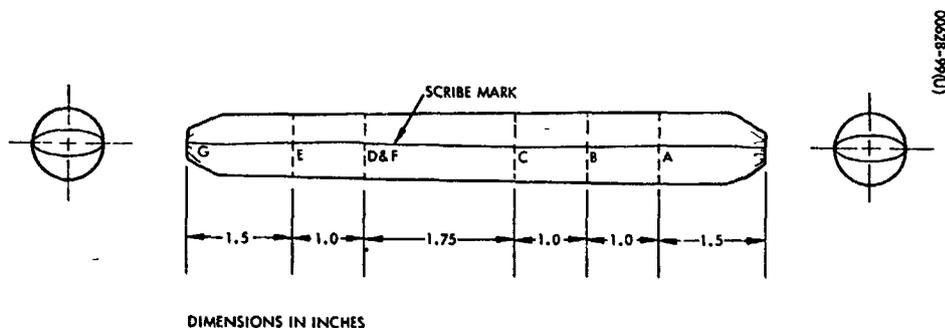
Sectioning Arrangement for Polished Aluminum Tube
